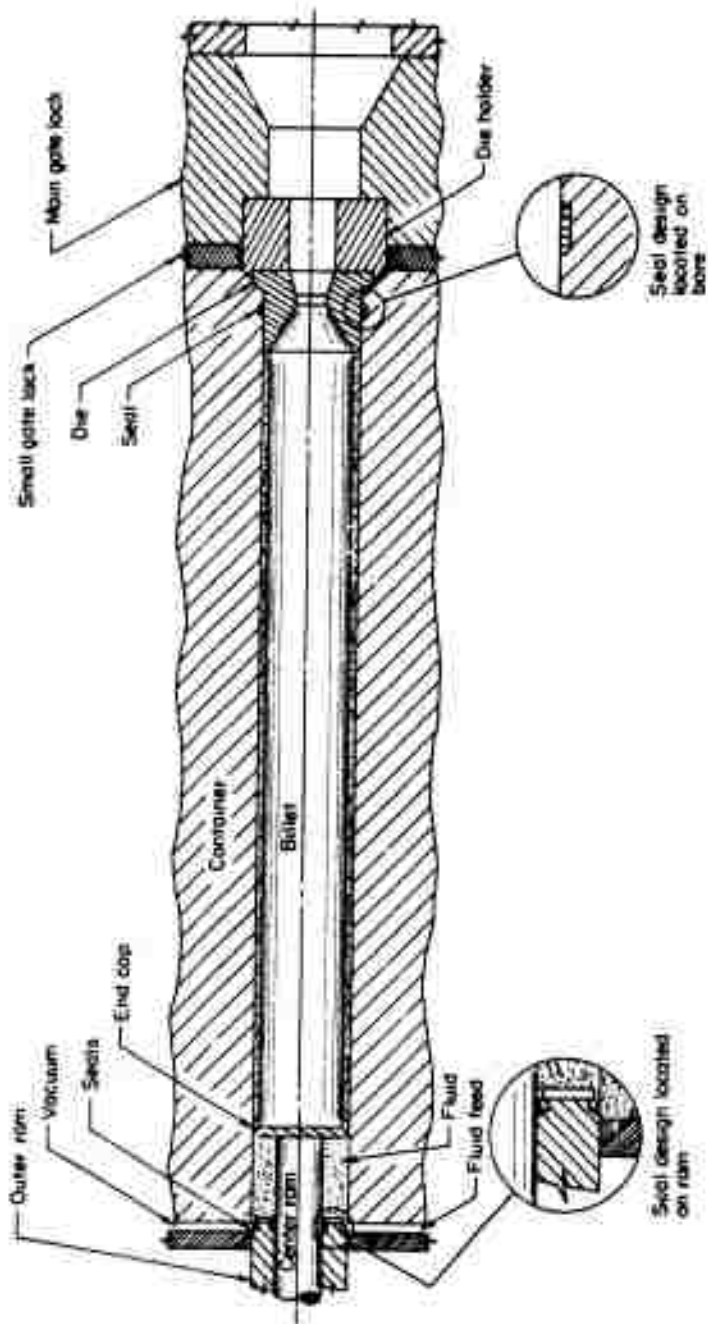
FLUID-TO-AIR EXTRUSION WITH 250,000 PSI CONTAINER
